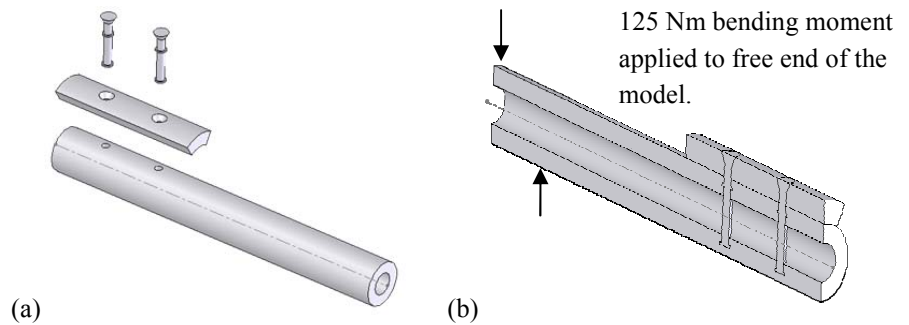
Parametric model geometry (a) Exploded view, (b) Cross-sectional view <sup>(12)</sup>
